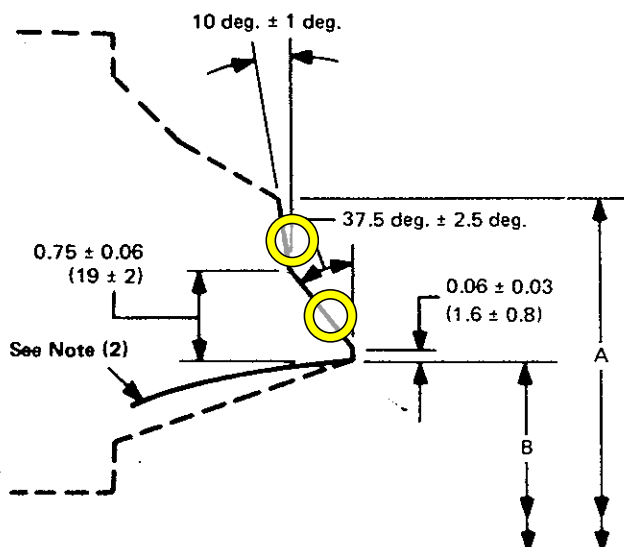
Welding End Detail for Joint Without Backing Ring
